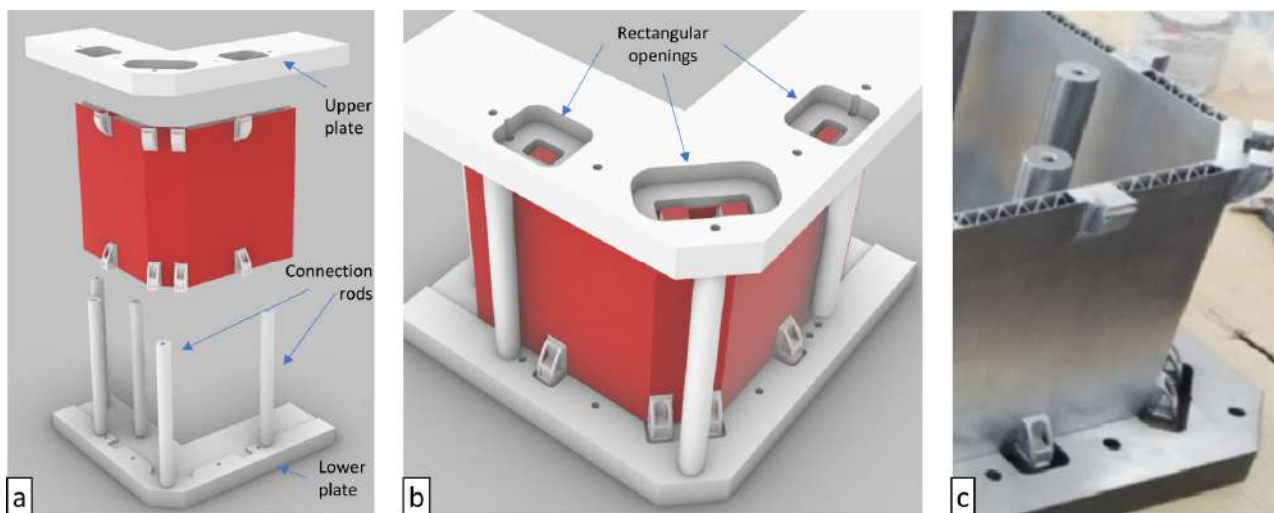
Exploded diagram of the assembly jig (a), assembled jig schematic (b) and real part during assembly (c). Surfaces to be machined are indicated in red.
